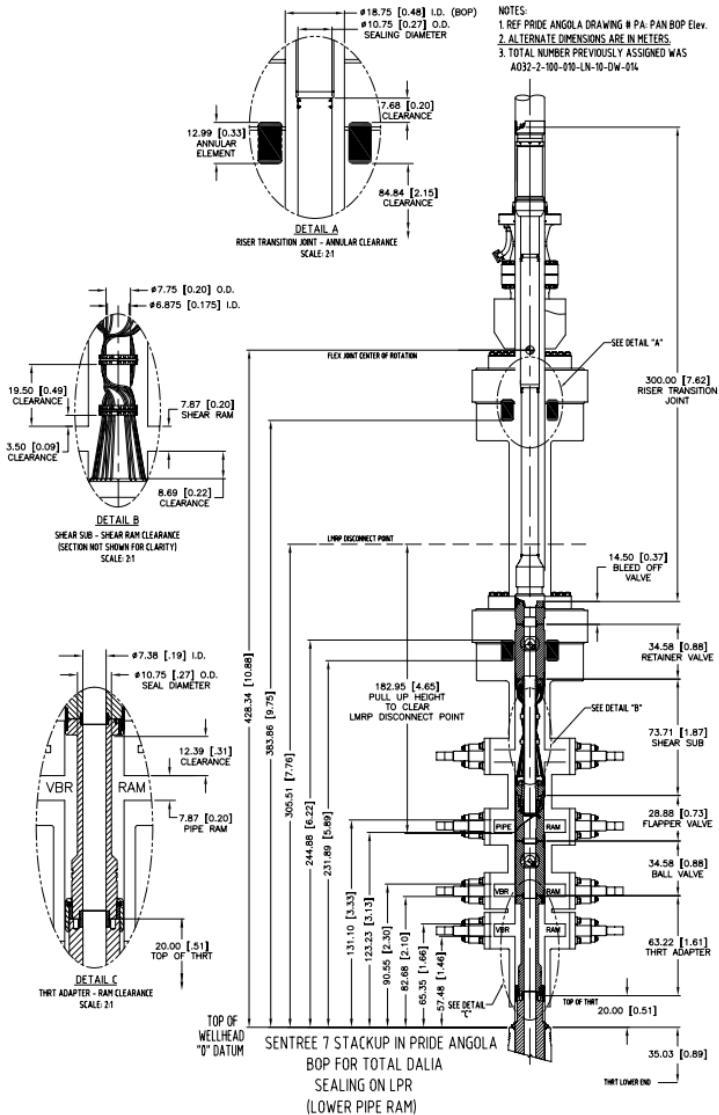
UW0690-00 / AO32-2-102-000-LN-10-DW-004 (Sheet 2/3)
